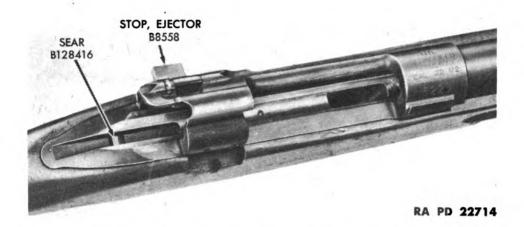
Receiver Section of U.S. Rifle, Cal. .22, M2 — Bolt Removed — Top View
